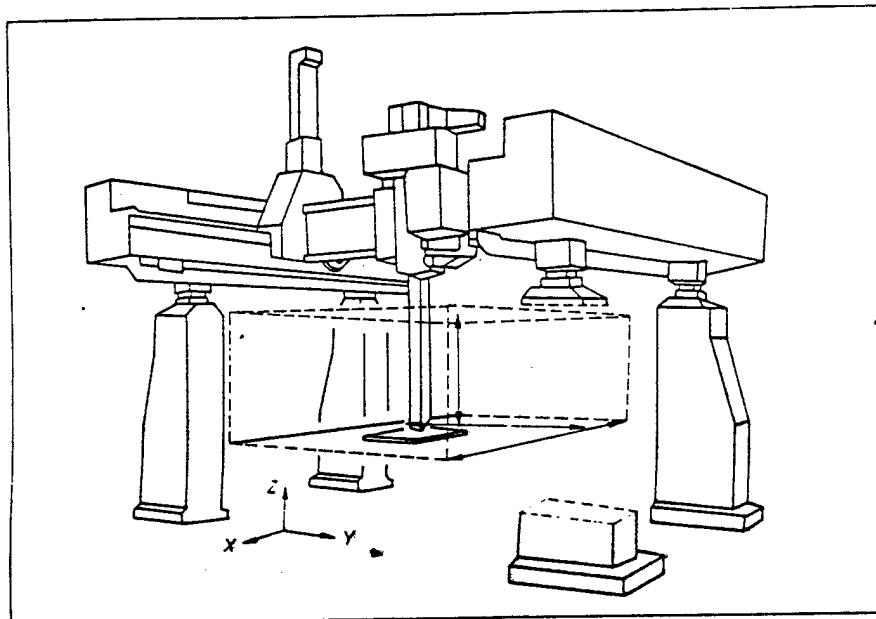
Testing the Positioning Accuracy of a Three-Coordinate Measuring Machine
